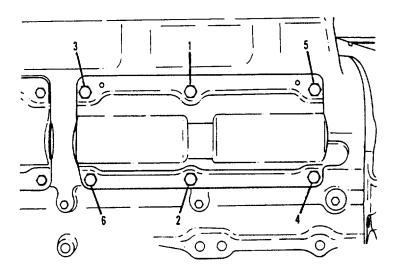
Cam Follower Housing Torque Sequence.
